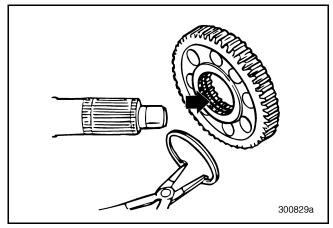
Removing Snap Ring from Inside Lo Gear (T313L/T318L Shown)
